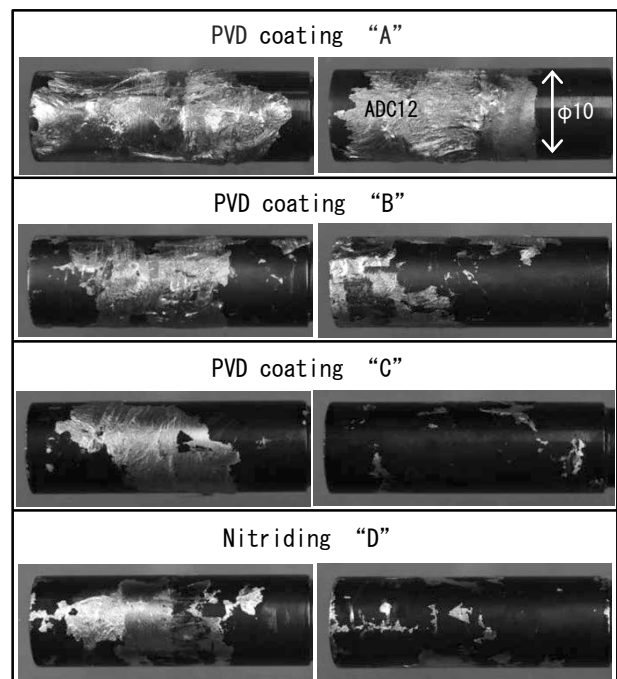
Appearance of coated round bar specimens after dipping into molten ADC12. Severe soldered parts and the most slightly soldered part around a specimen are shown.
